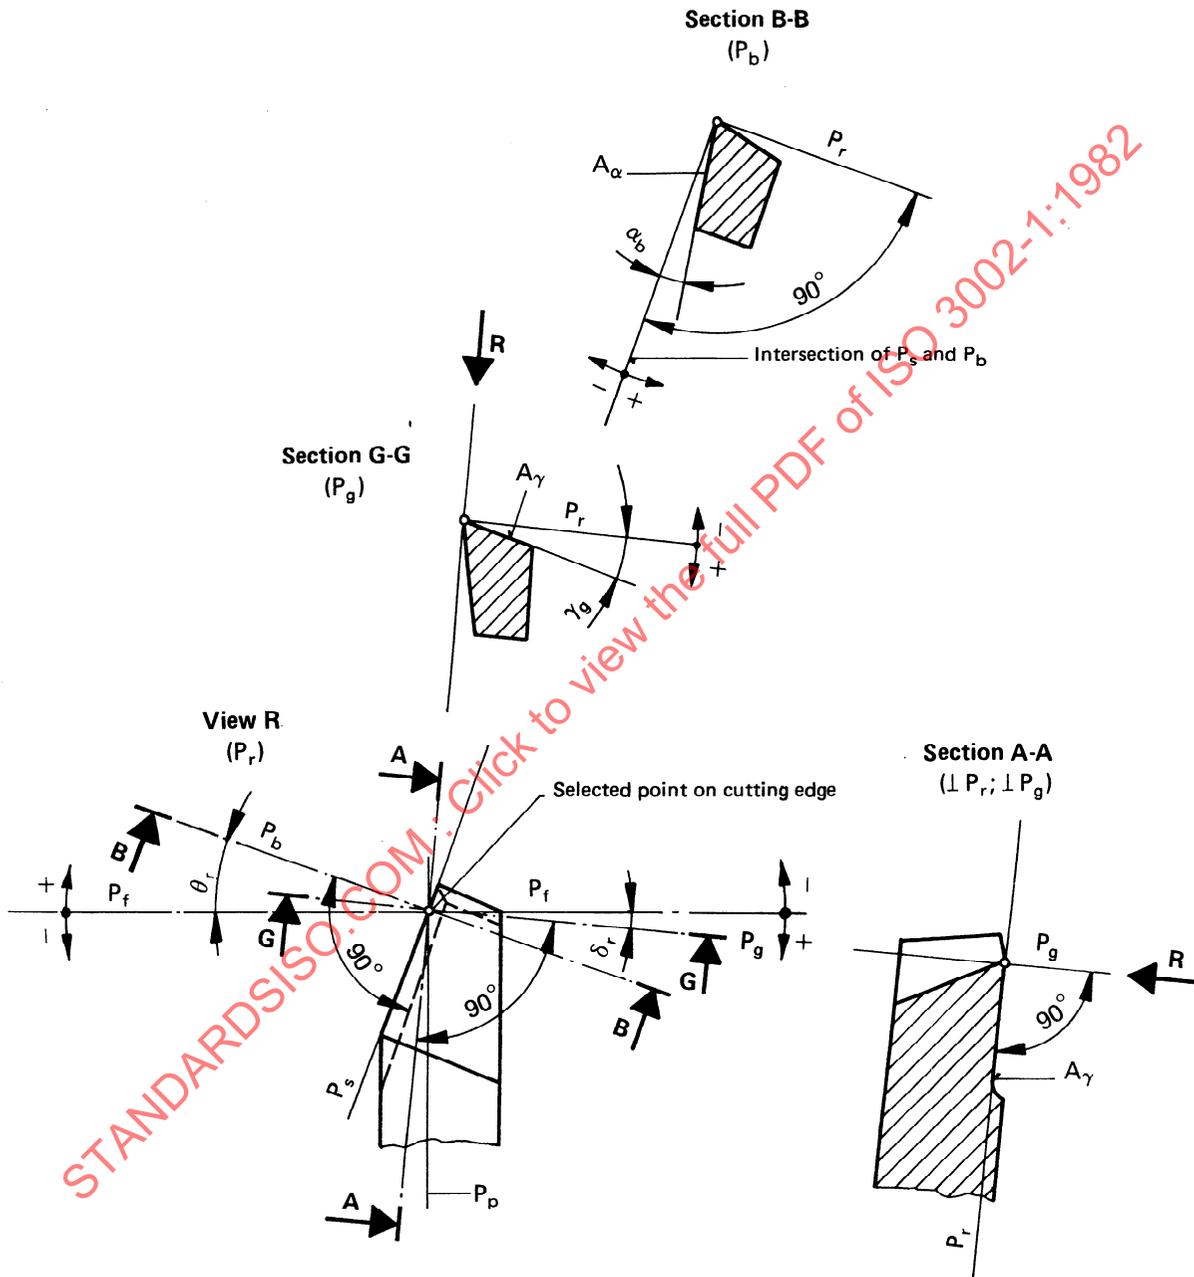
Tool geometrical rake γ_g and tool base clearance α_b — Turning tool
